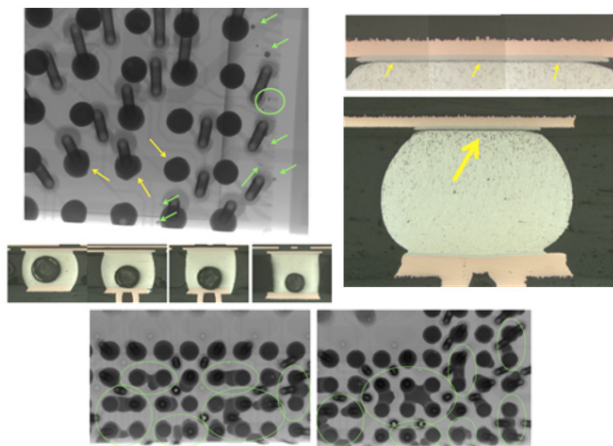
Solder Balling with Solder Joint Encapsulant Material B on DDR4 TV
